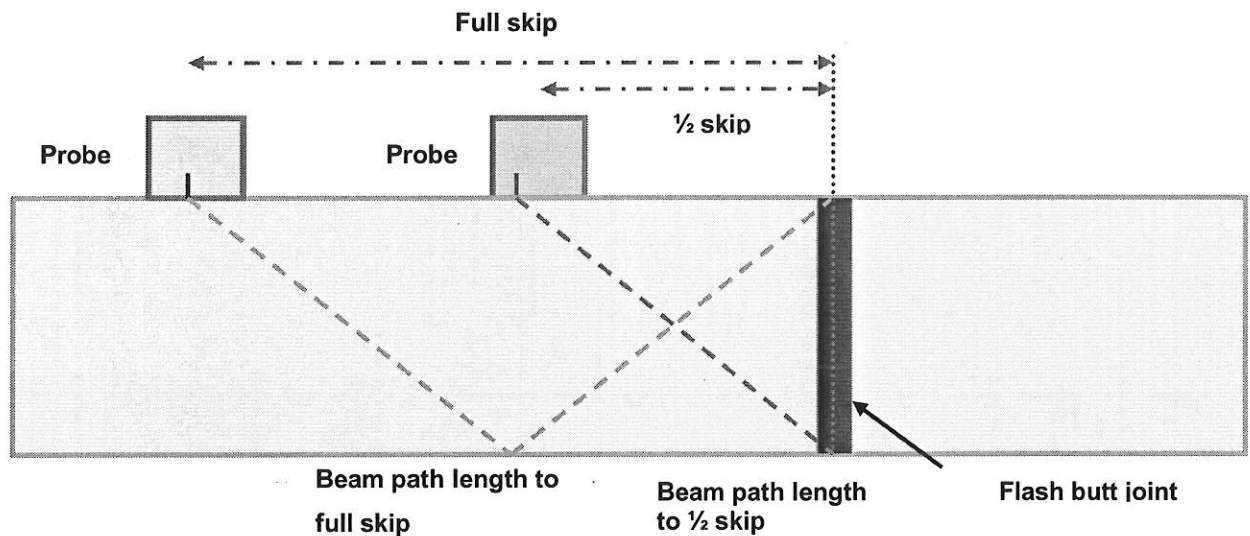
Schematic presentation of scanning limits and probe placement for testing the flange of a flash butt welded rail.
